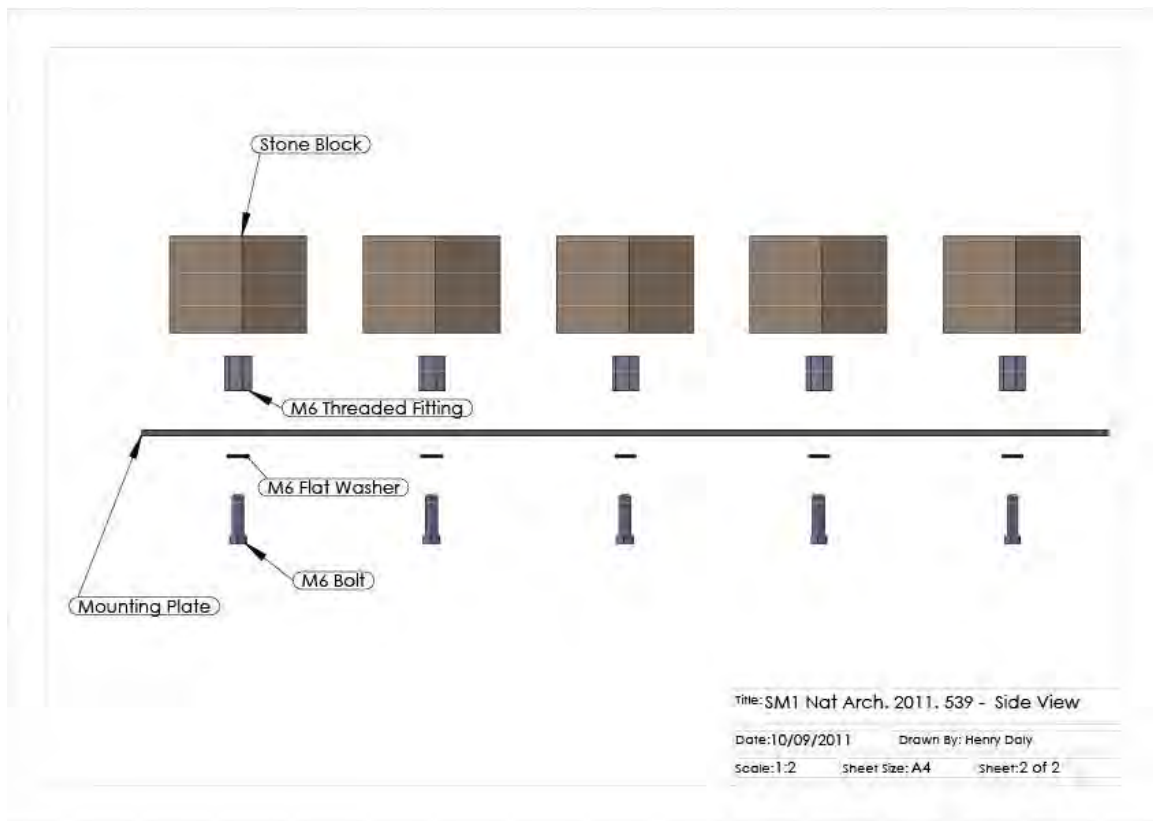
Exploded side view of LegIT fixing system (drawing by H. Daly 2011)
